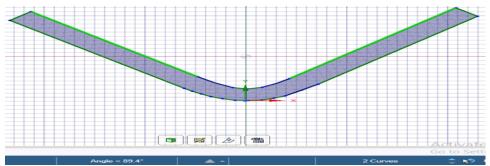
Measurement of springback angle after bending of 3mm sheet in 22milimeter die opening and 0 holding time.
